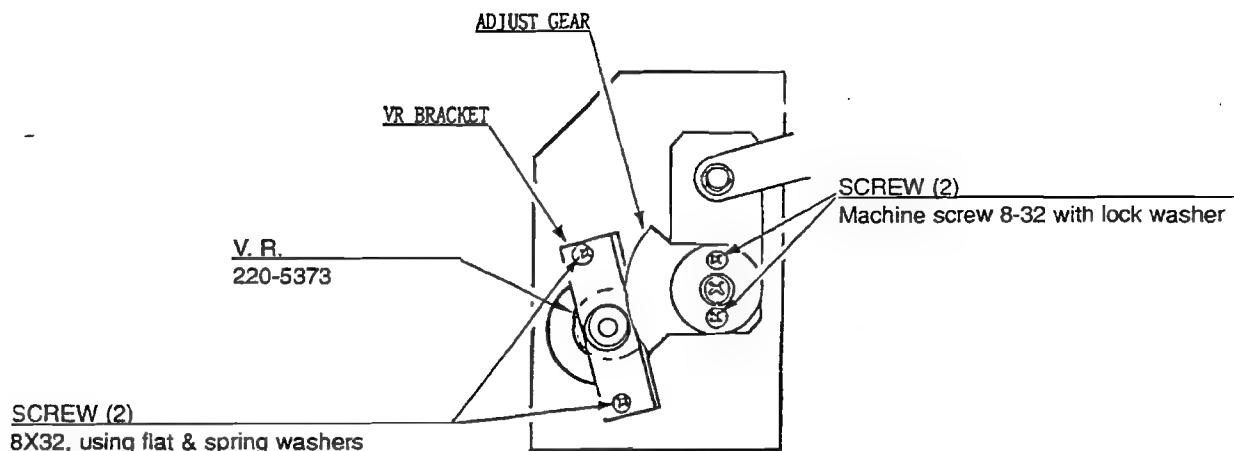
ACCELERATOR AND BRAKE ASSEMBLY
